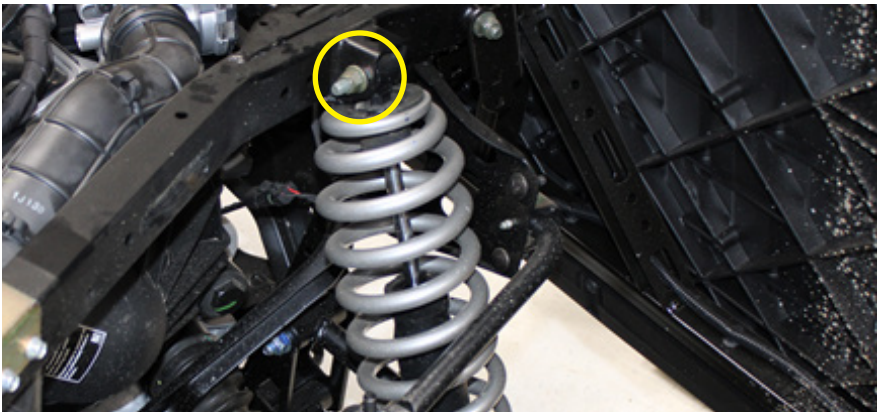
Remove Rear Shock Upper Mounting Bolt using 15mm Socket and 15mm Wrench
